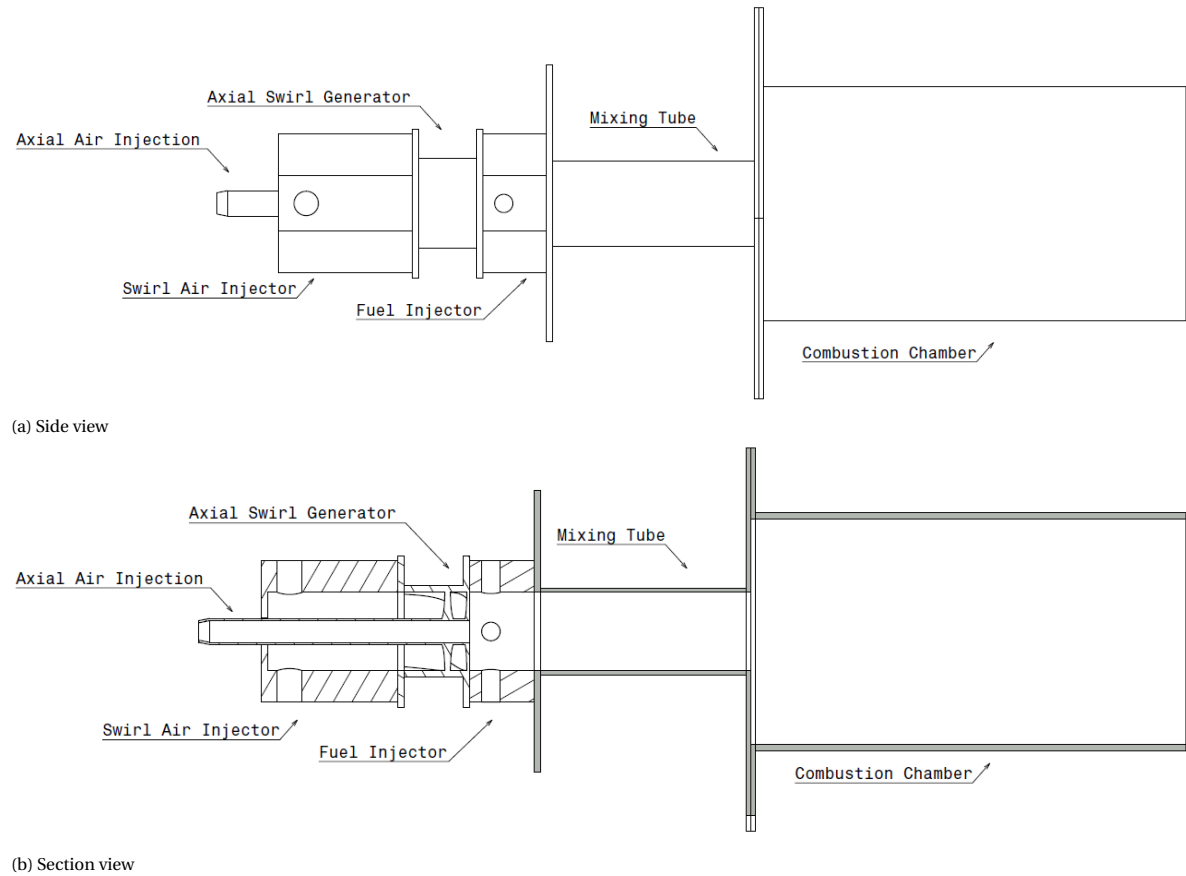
Technical drawings of the axial swirler combustor model with axial air injection
